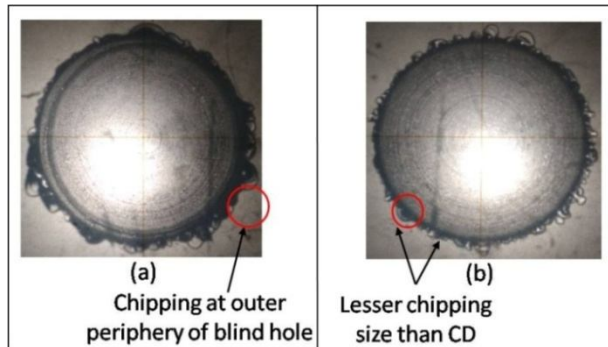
Chipping images of machined blind holes by CD and RUD by a Flat cylindrical tool ($Height < Diameter$) (a) Blind hole by CD (b) Blind hole by RUD
